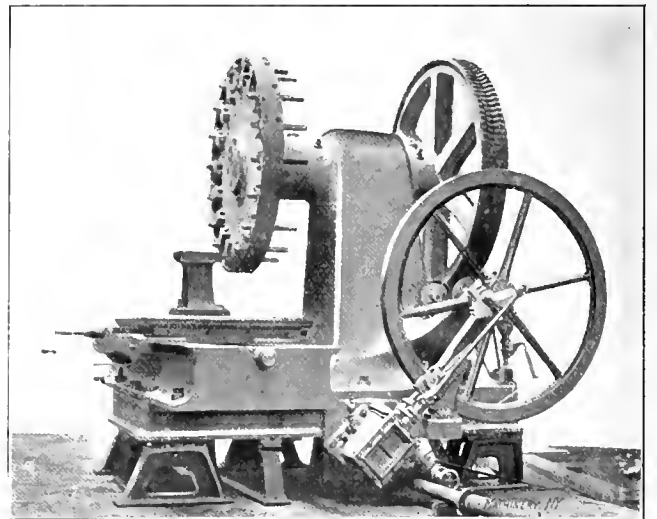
Very Large Type of Milling Machine, driven by Steam Engine. Joseph Whitworth & Co. (About 1867)
